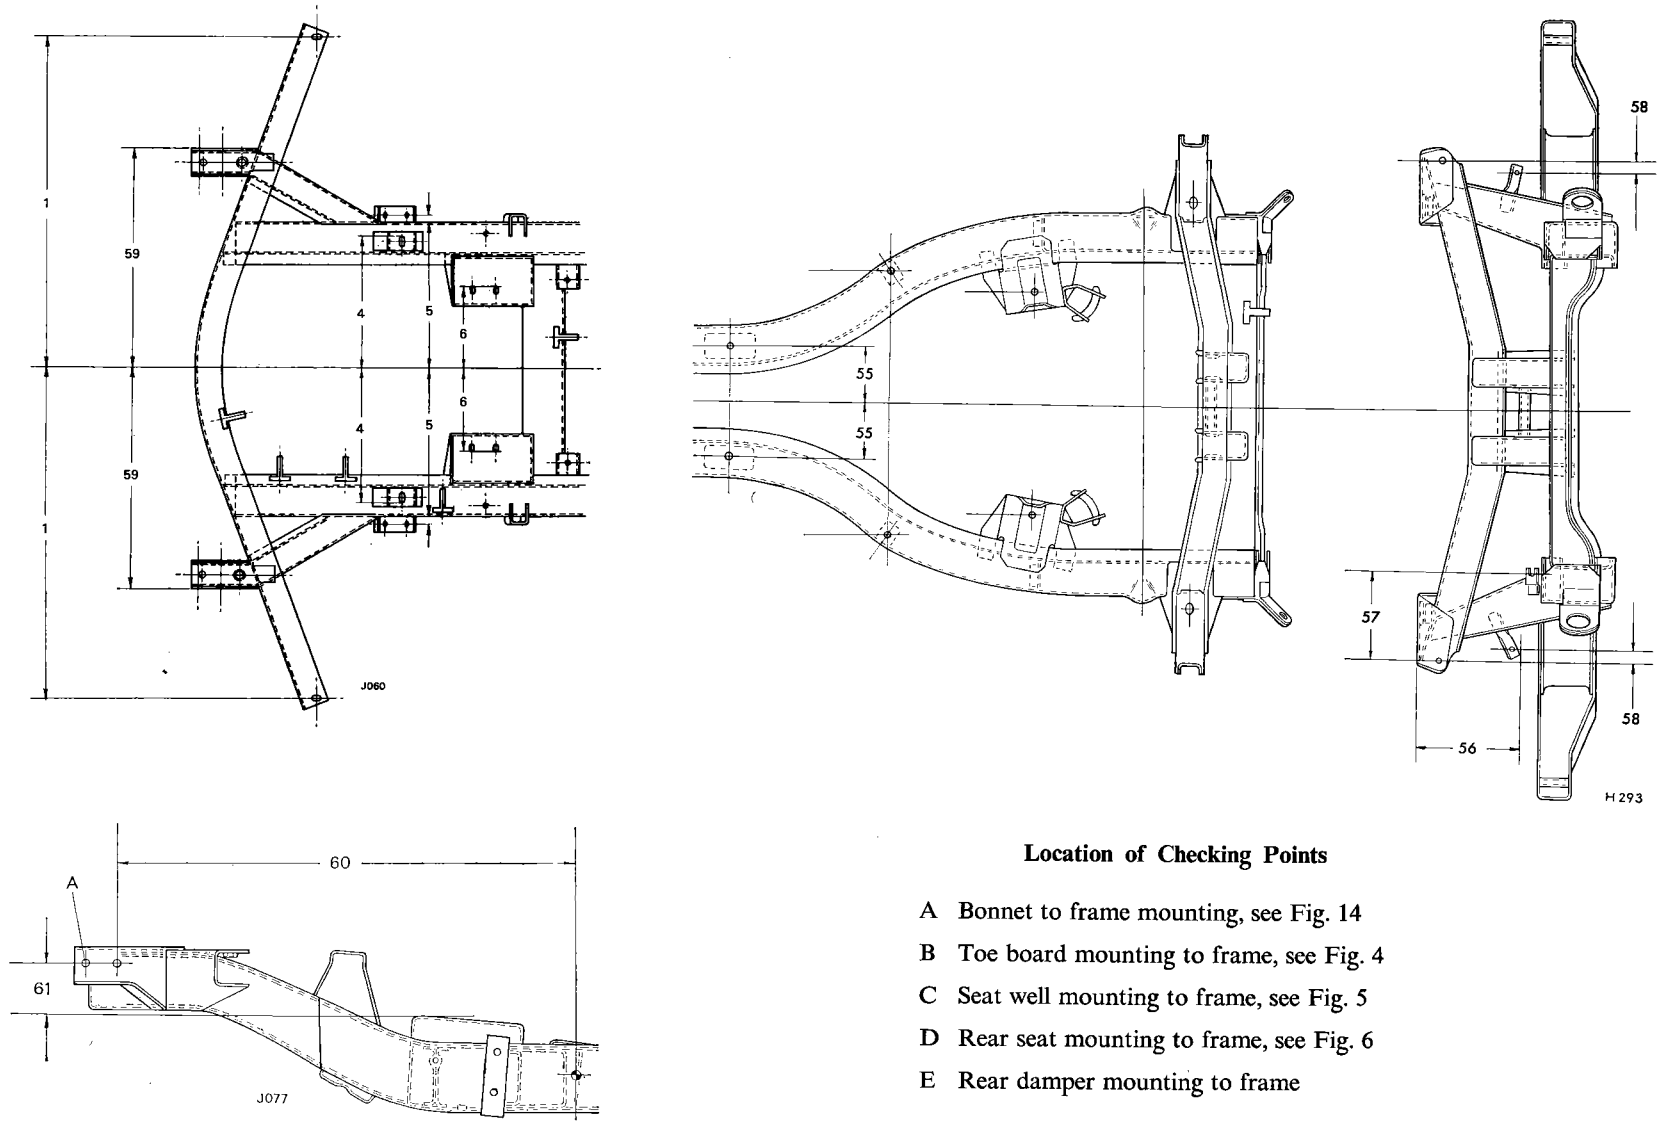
Chassis frame dimensions (Spitfire Mk. 3) Refer to page 5.403 for dimensions
